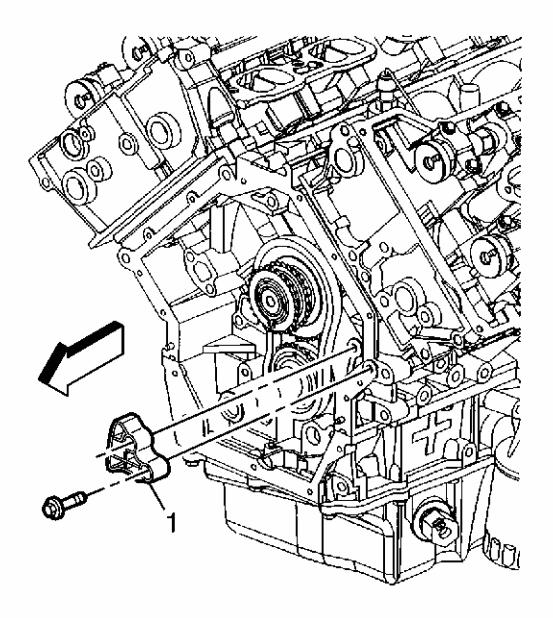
Locating Primary Camshaft Drive Chain Guide & Bolts Courtesy of GENERAL MOTORS CORP.
